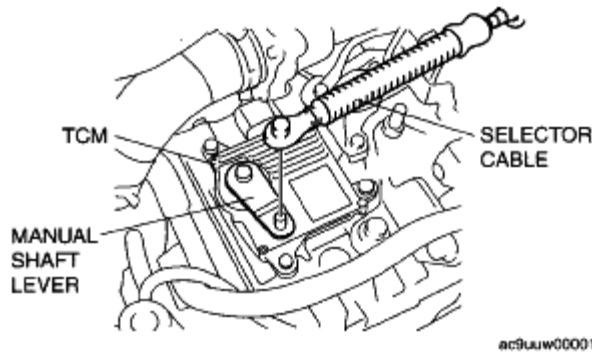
Identifying Manual Shaft Lever & TCM Connector
